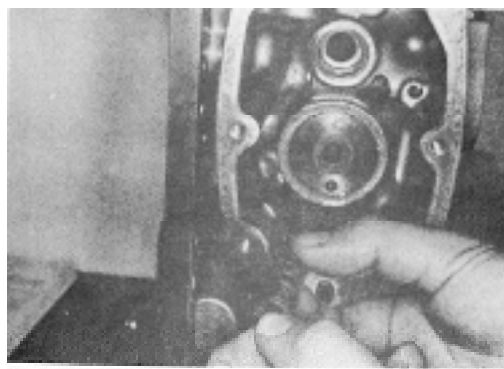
, F5139. Removing torque spring Governor Plunger
